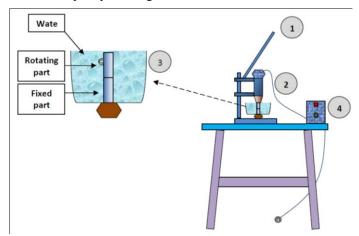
Rfw Machine Used for Underwater Welding.
